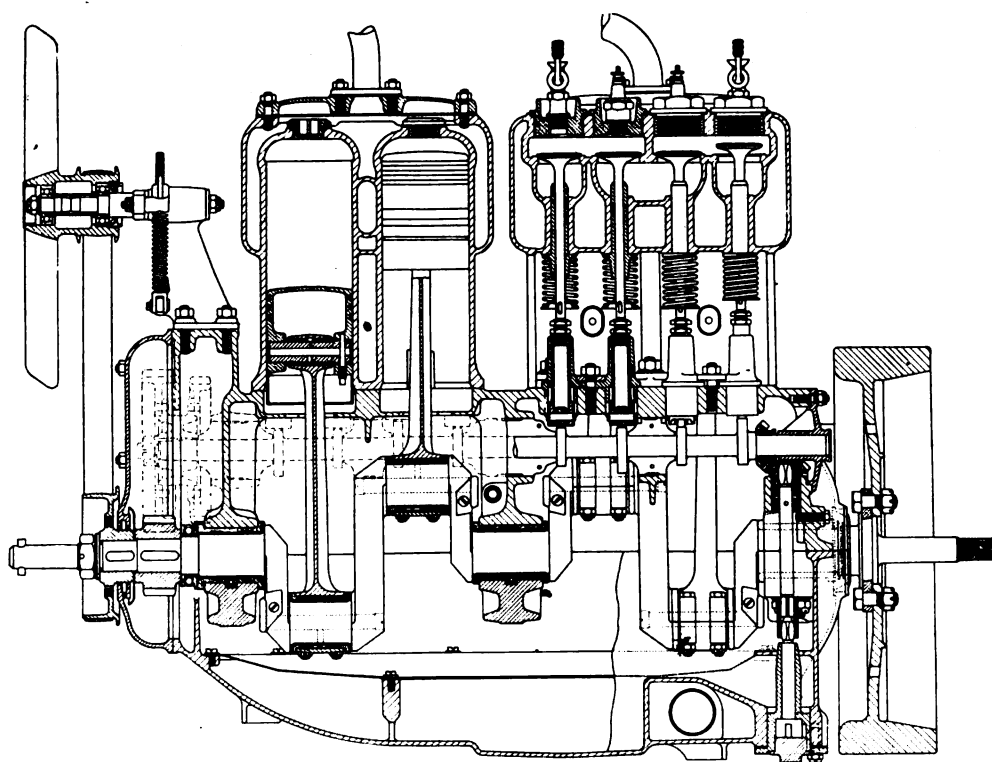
Longitudinal section of Benz 4-cylinder engine. Note inlet passage cast between cylinders of each pair
